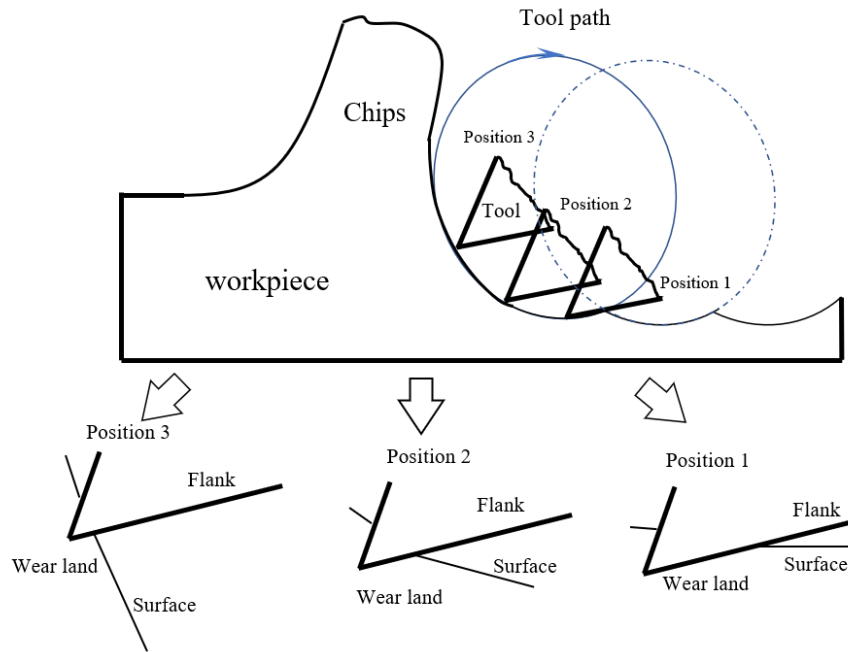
Relative motion between the workpiece and the tool in 2D vibration assisted machining
